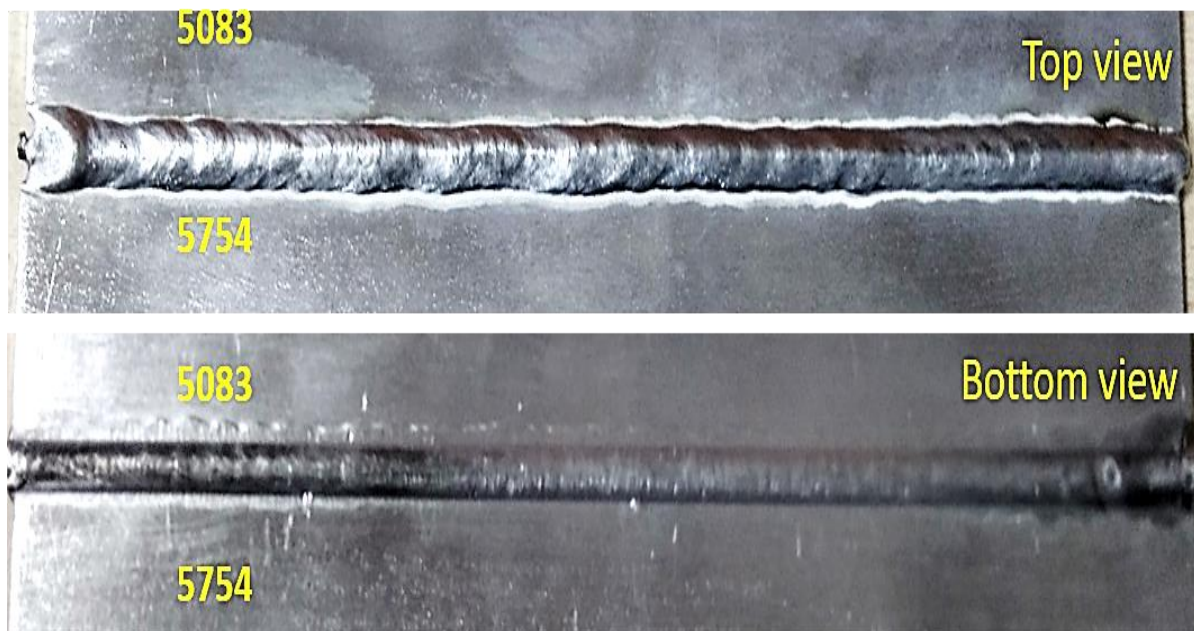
Surface appearance of the CMT welded A5754-H111 and A5083-H111 joint using ER4043 filler wire
